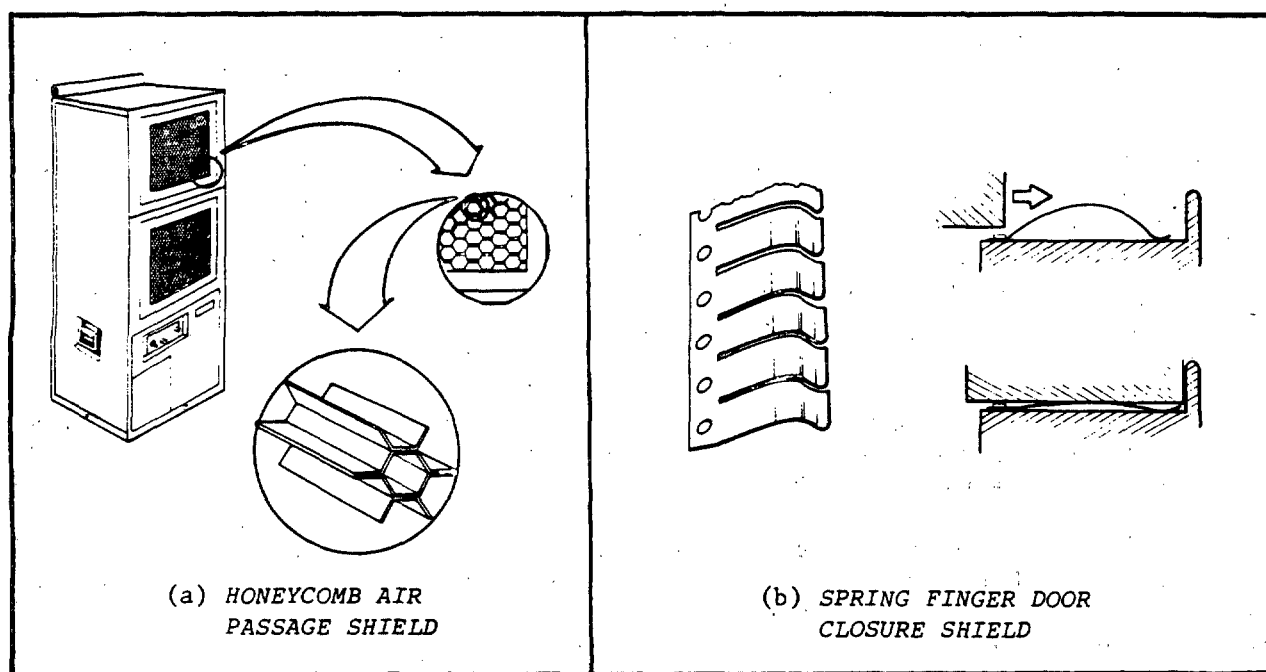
Examples of EMP shielding for air passages and door closures.
